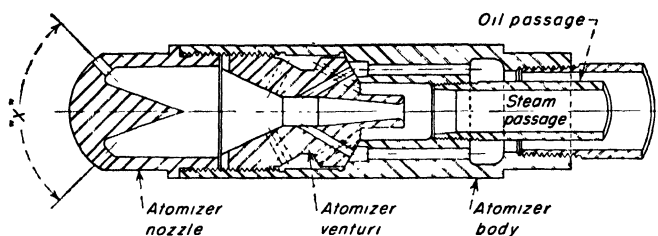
Inside mixing burner, steam atomizing. (The Engineer Company.)
